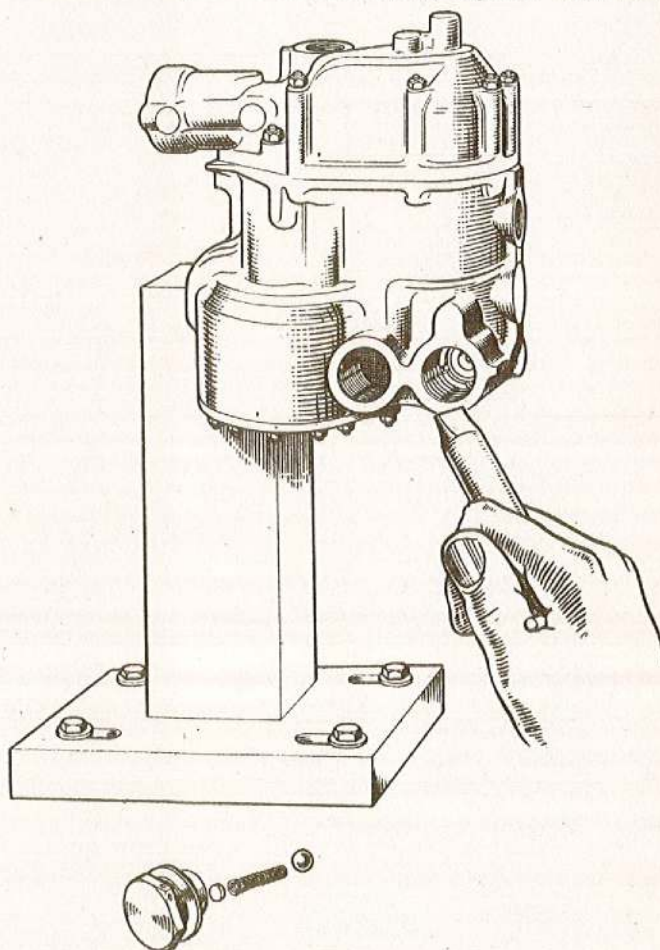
Use of special spanner T.166362 for removing and fitting relay relief valve seat
